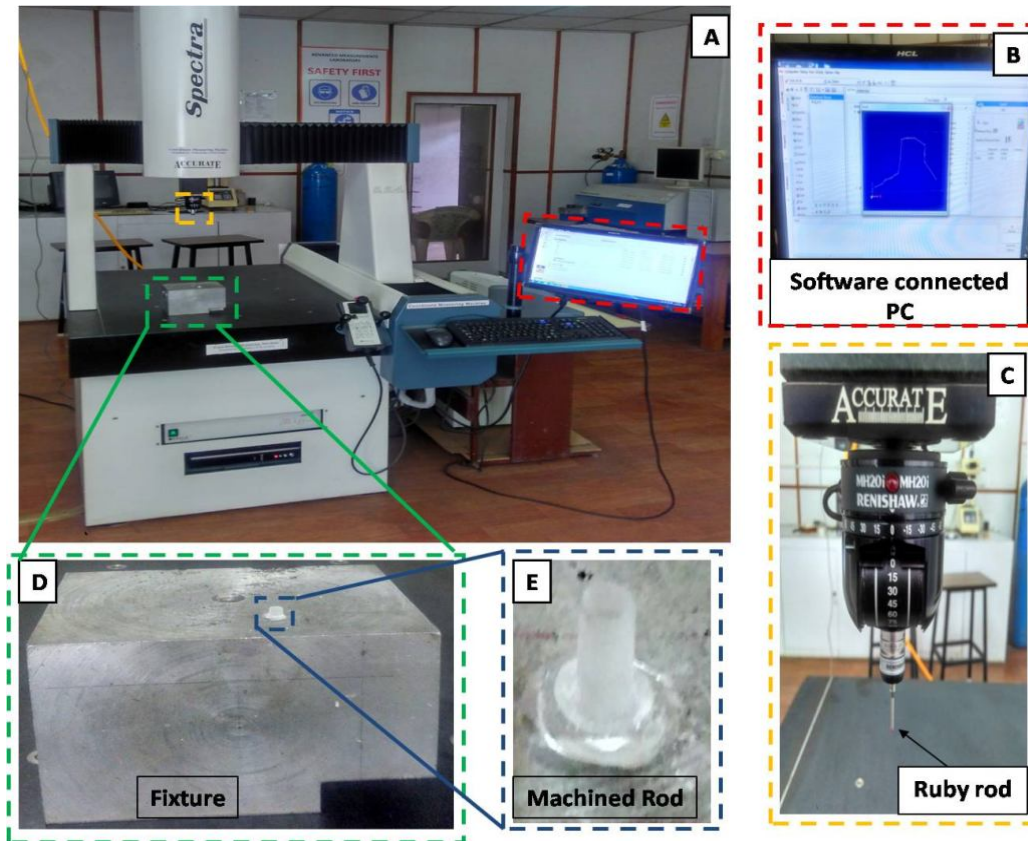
Description of CMM's set up which includes: a) Complete CMM equipments; b) Probe system and Stylus; c) Software connected PC; d) Fixture e) Machined rod
